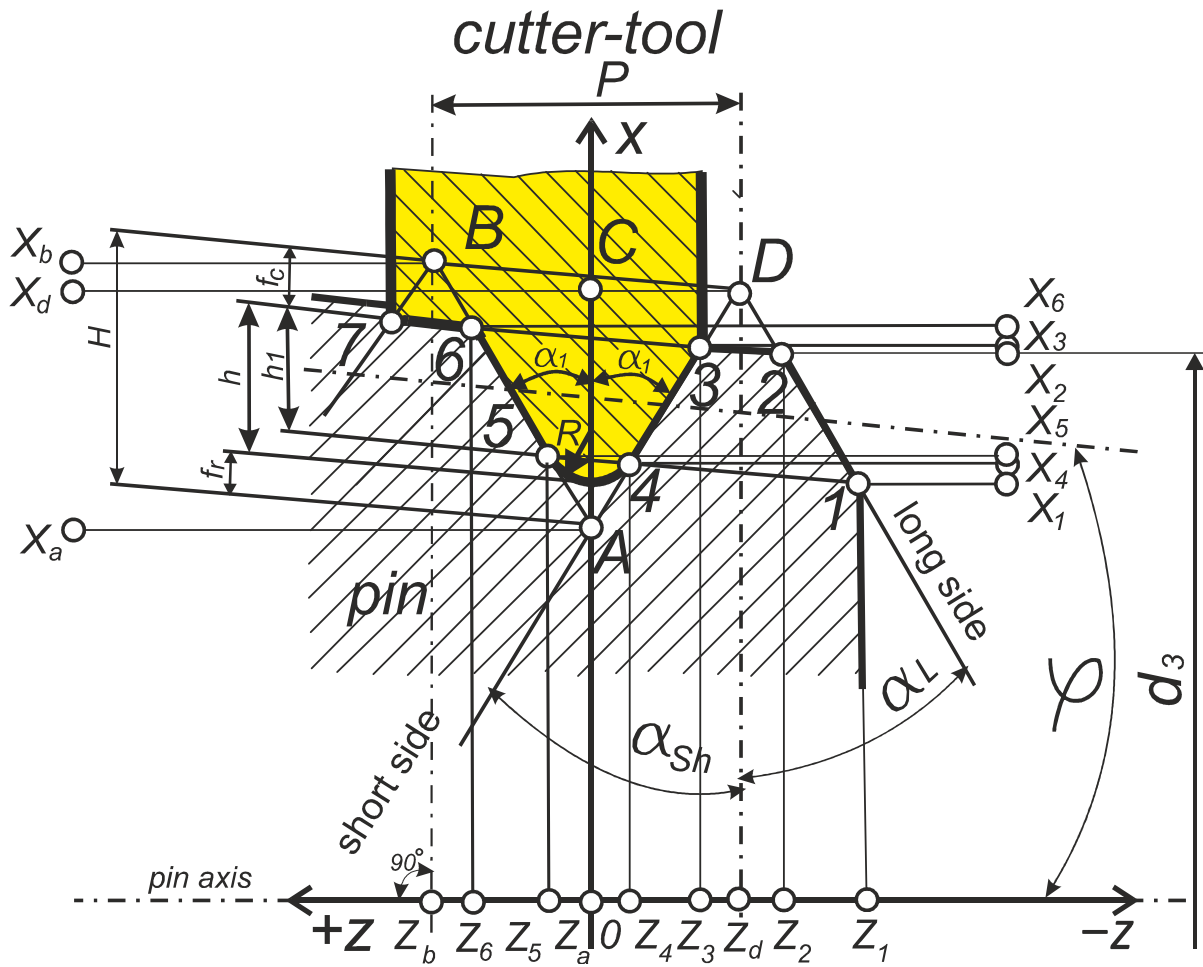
Scheme of obtaining the profile of a drill-string thread, which is made using the full-profile lathe thread cutting tool (yellow).
